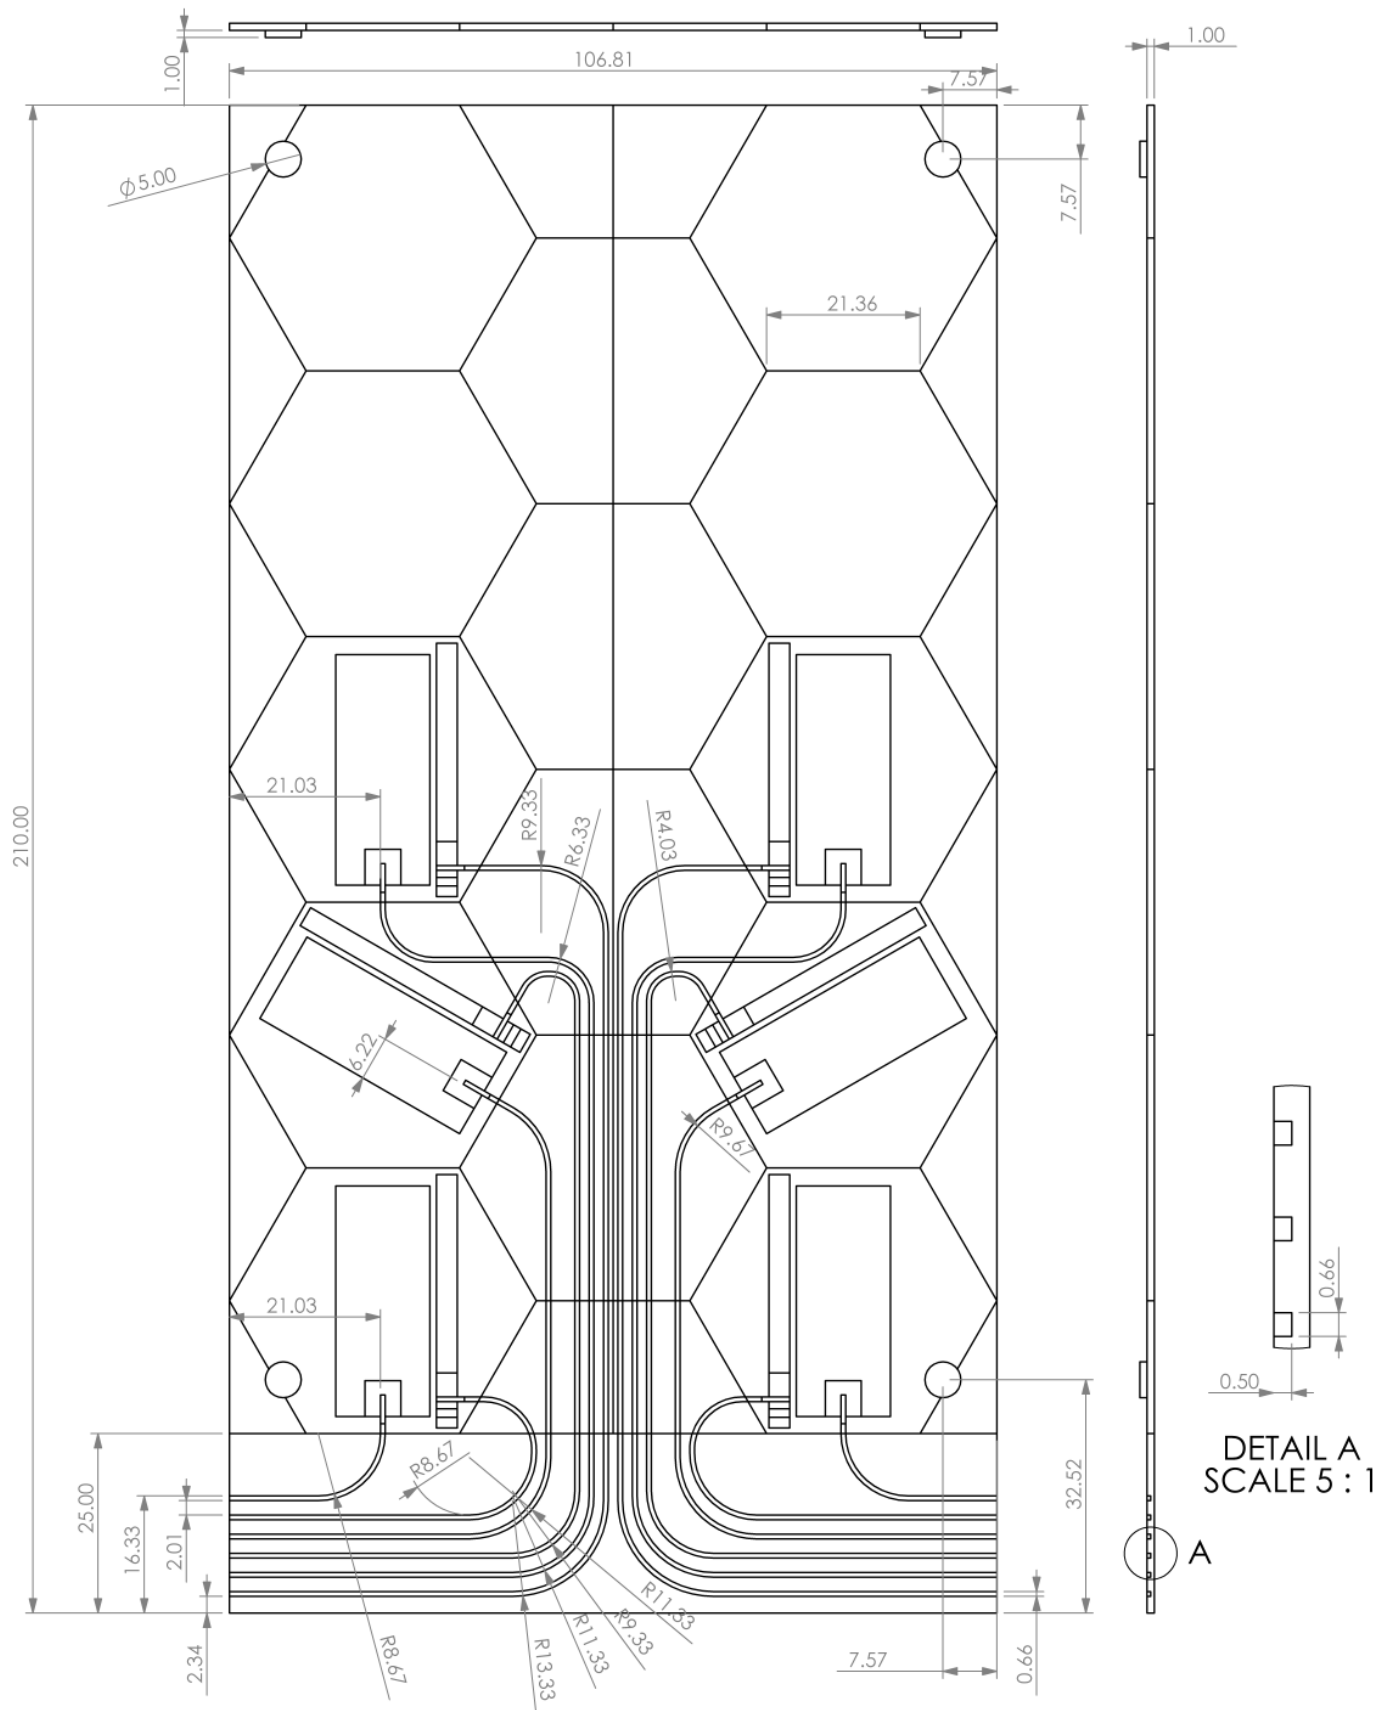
Part drawing for one half the Octo Flexure. This is part A, the part with four round cylinders near its corners which fit in to the round holes of Part B, and where the sensing piezo have the wire coming straight down out of the piezo.
